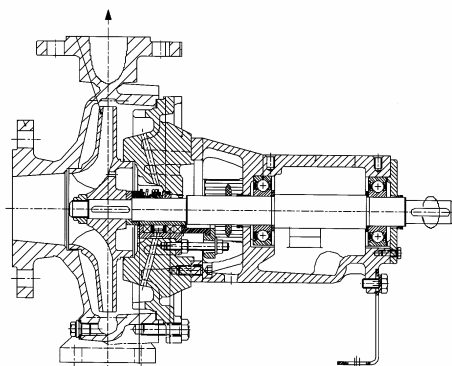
Conventional pump with uncooled mechanical seals
